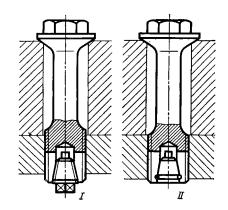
Locking cap screws with split end I-by threaded conical plug; II-by plain conical plug
